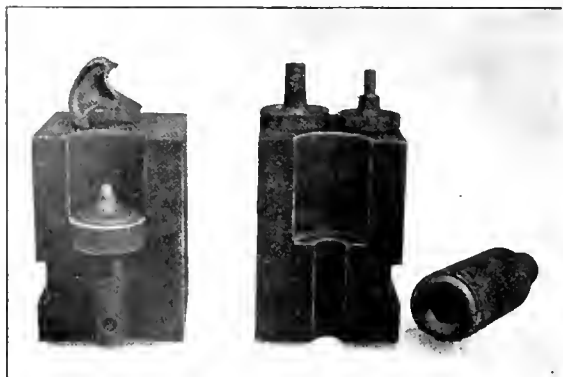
DIES AND HEADER FOR VACUUM RELIEF VALVE.
